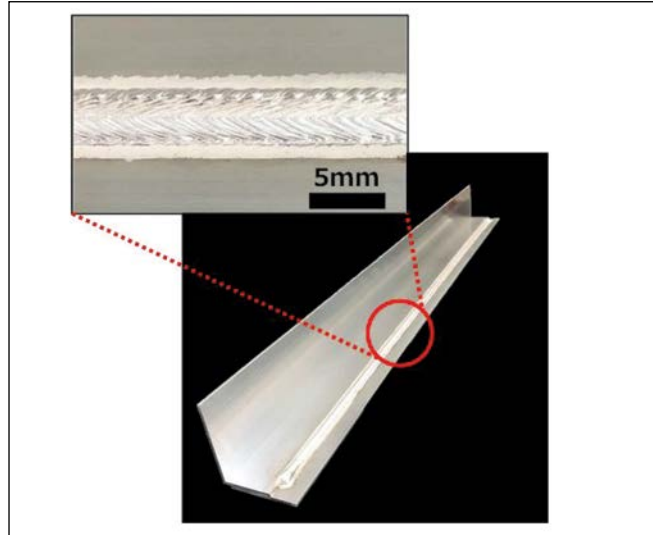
Extrude aluminium alloy welding result by Laser AC synchro-feed GMA hybrid process.
